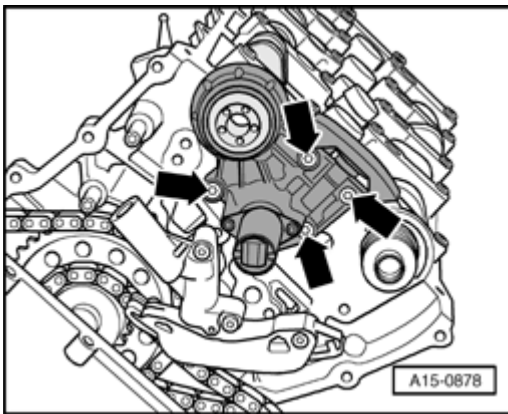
Removing Housing For Camshaft Adjustment Solenoid Valves
